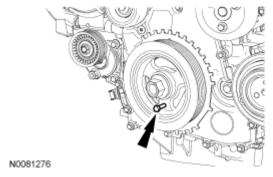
Identifying 6 mm x 18 mm Bolt Courtesy of FORD MOTOR CO.
